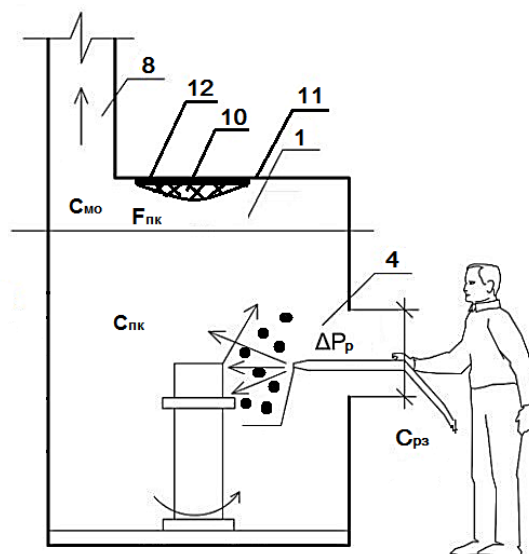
The system of the shot blasting section of the foundry: 1 – shot blasting chamber; 2 – loading sector of the parts to be cleaned with a sealed door; 3 – control panel; 4 – shot blasting machine feed window; 5 – technological hole with a sealed lid for removing shot; 6 – compressed air line; 7 – air supply to the nozzle; 8 – air duct; 9 – conical air purification cyclone; 10 – VDM (vibration damping material); 11 – structural material; 12 – SAM (sound-absorbing material). Legend: C_{p3} – concentration in the working area, $C_{пк}$ – concentration in the dust chamber, C_{mo} – concentration in the local suction, $F_{пк}$ – the area of the dust chamber, ΔP_p – pressure drop during control
